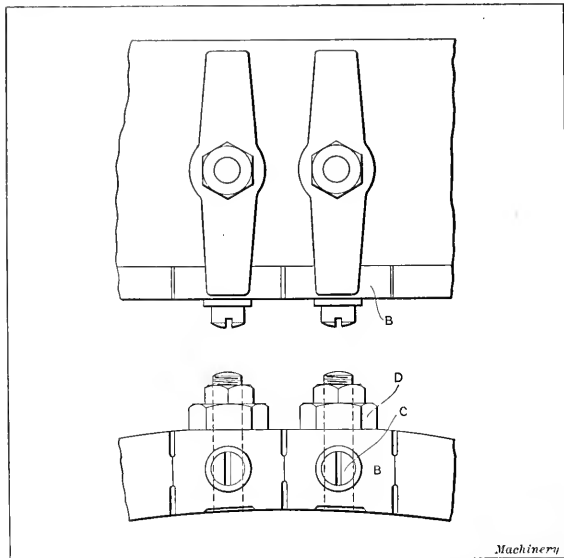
Illustration showing how the Blocks on the Master Dividing Wheel shown in Fig. 6 were made and held in Place
